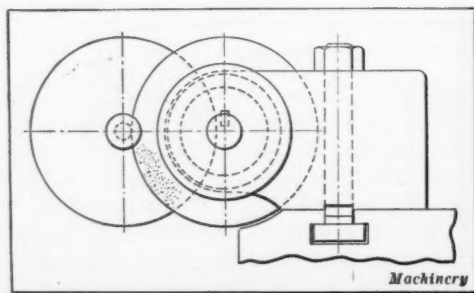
End View of Grinding Attachment shown in Fig. 2
